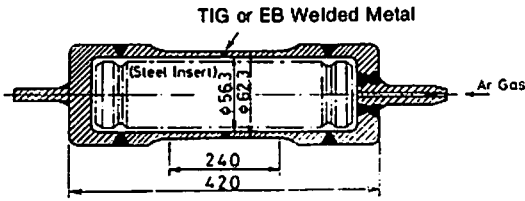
Structure of welded cylindrical specimens for internal pressure creep tests
